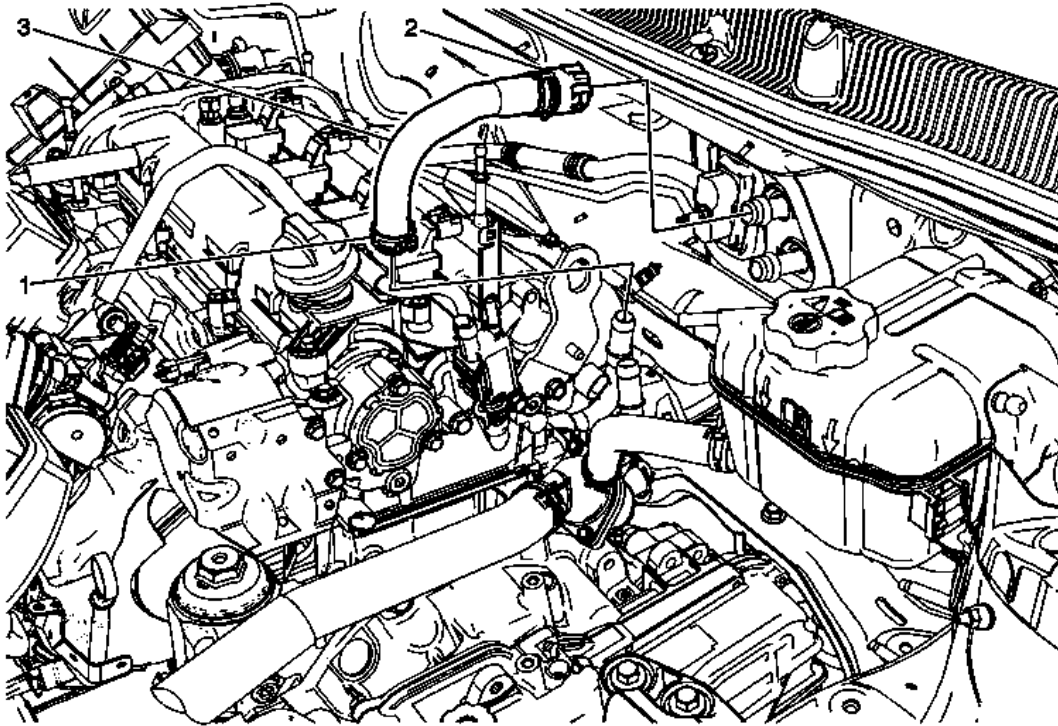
Heater Inlet Hose, Clamp & Disconnect (LEA)
